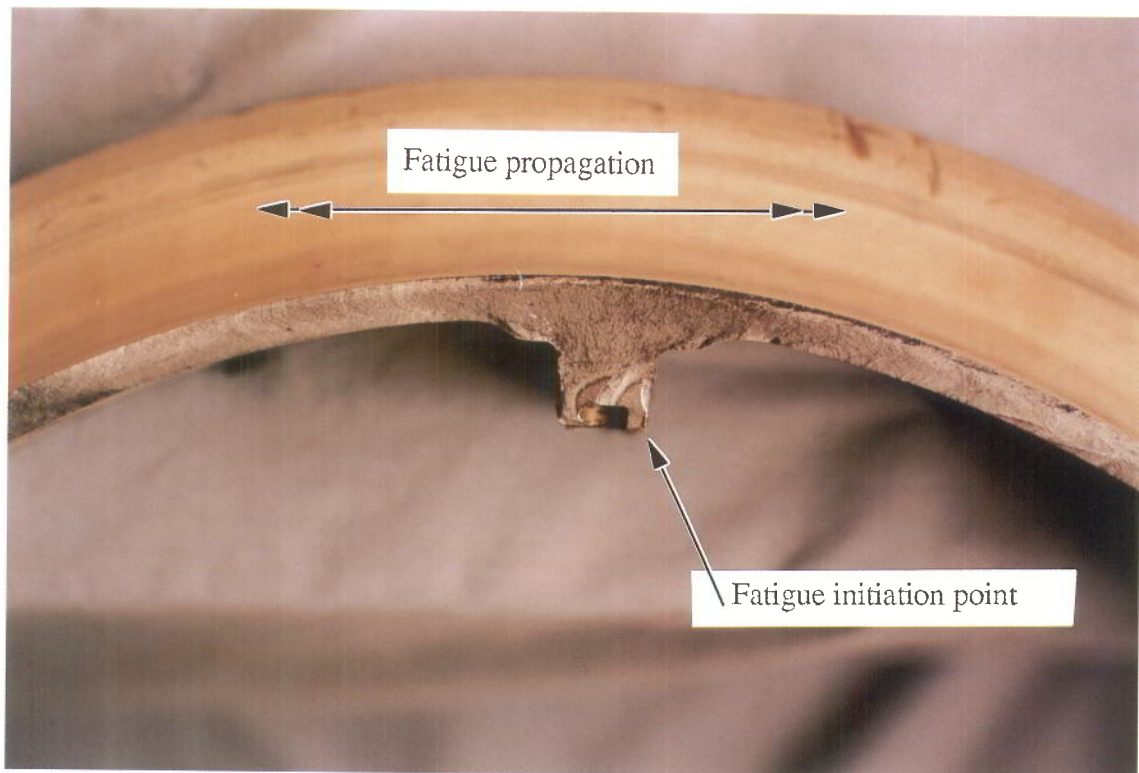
Wheel rim fatigue detail - (D-AIPS)
